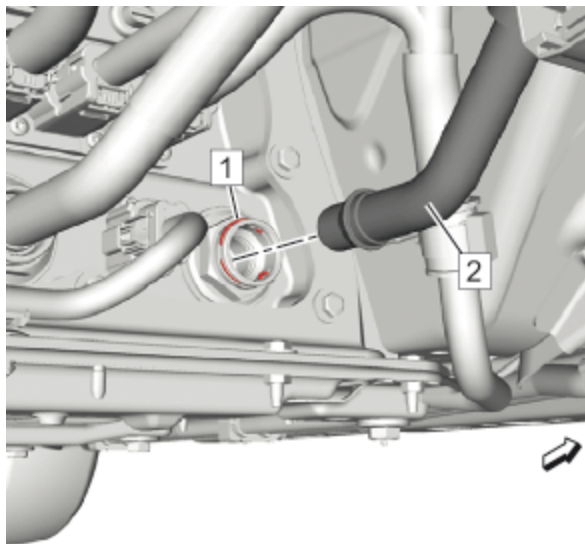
Clamp And Drive Motor Battery Coolant Outlet Hose
